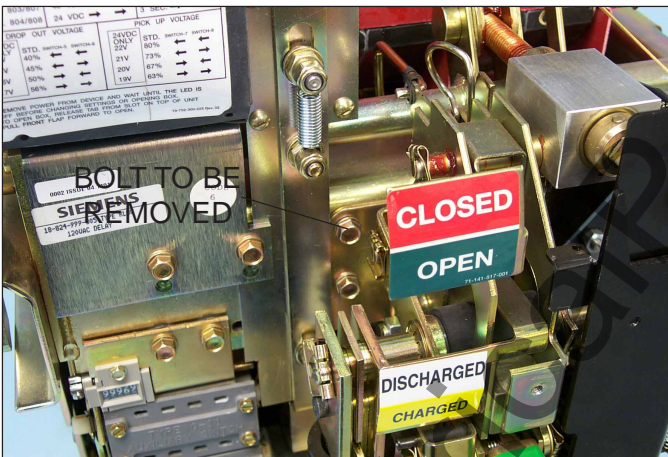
Bolt to be Removed and Saved (LAF-1600 C).
